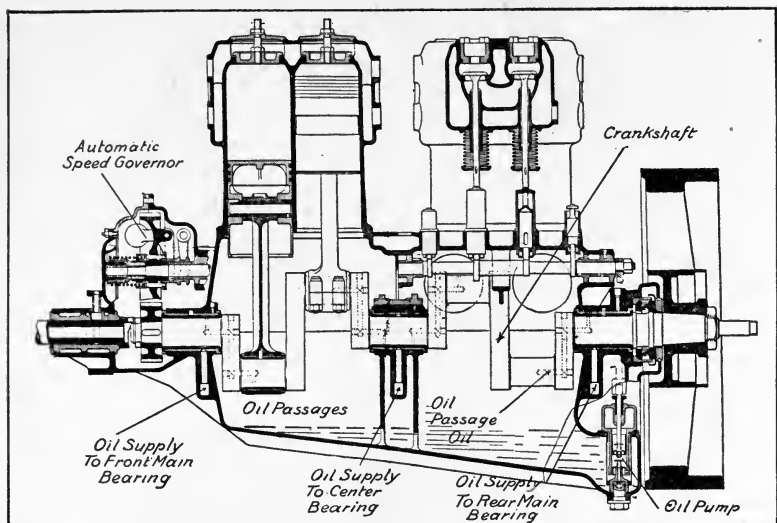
Method of Supplying Oil Under Pressure to Main Bearings, from which It is Directed to Connecting Rods by Passages Drilled in Crank Shaft.
